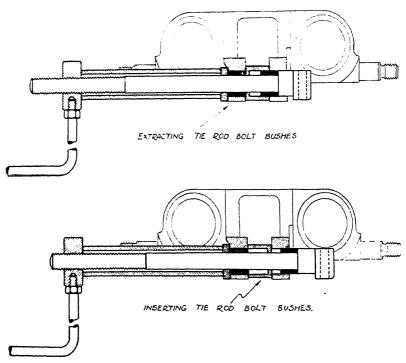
APPLICATION OF TOOL FOR INSERTING OR EXTRACTING TIE ROD BOLT BUSHES.
